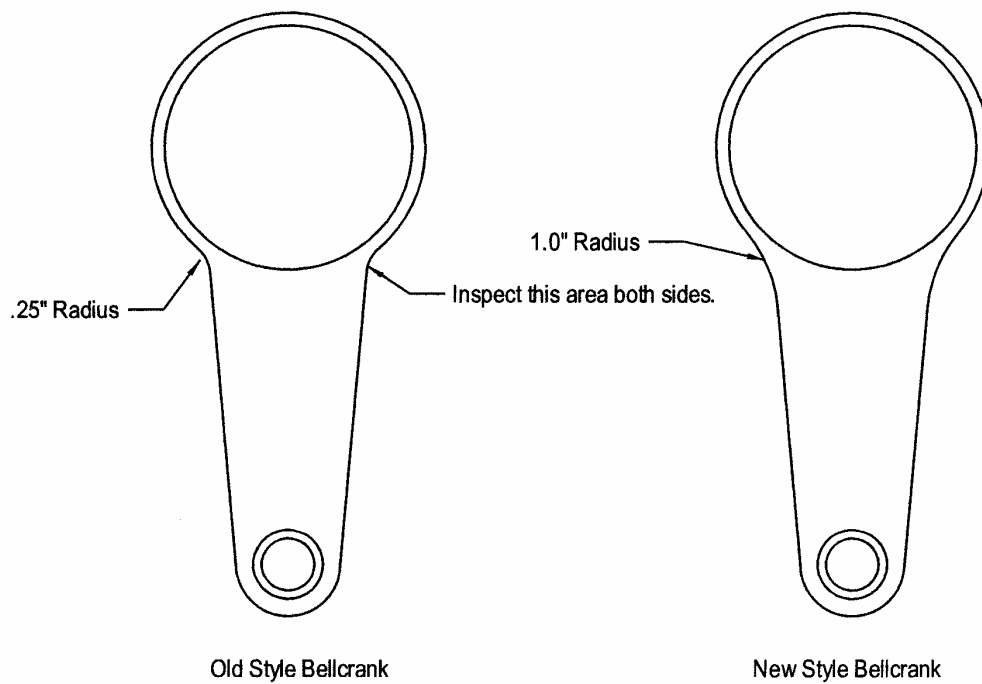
Radius Measurement Location for Bellcrank P/N 28-16233-1
